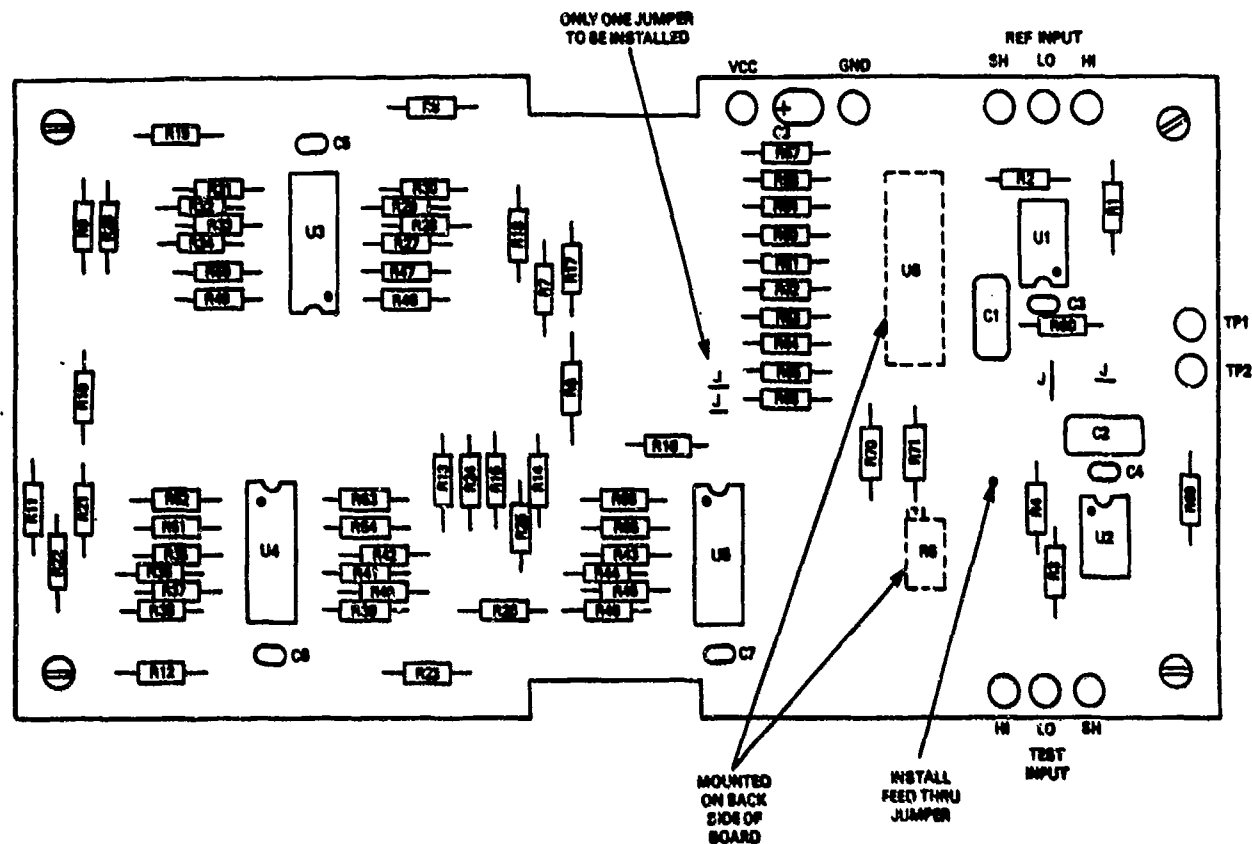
LAYOUT FOR PRINTED CIRCUIT BOARD FOR THE
